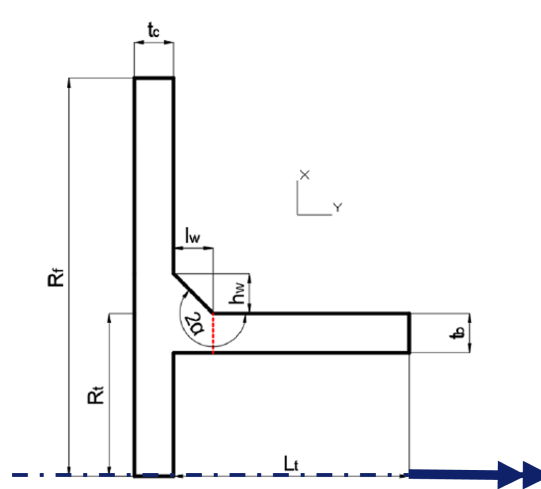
The 2D geometry of the tubular joint with dimensions.
